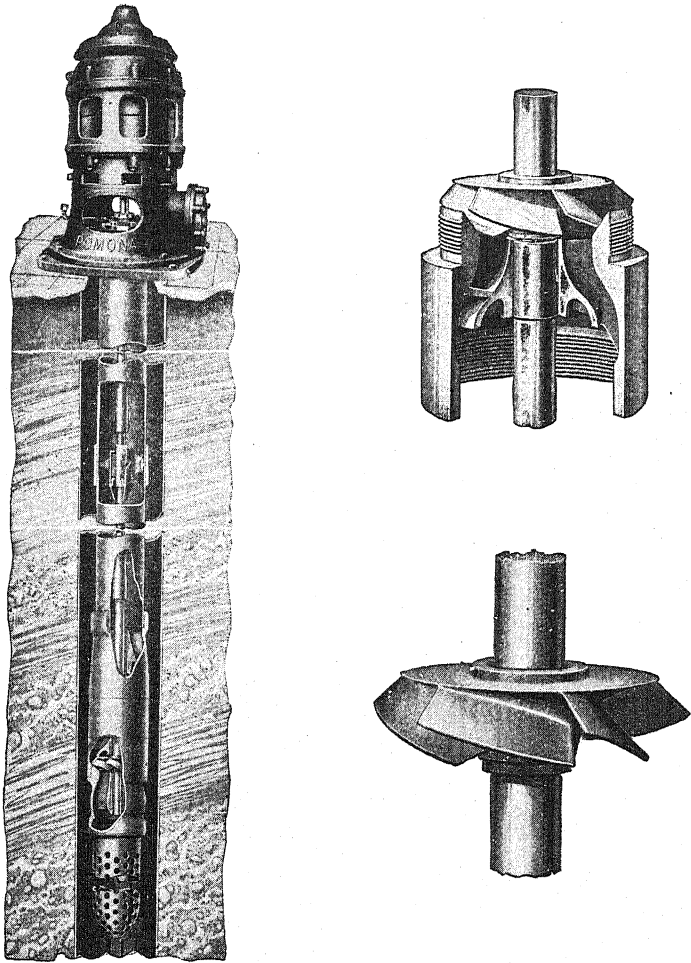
Cutaway section of Pomona Turbine Pump and Motor and details of bowl and impeller keyed to shaft. (Courtesy: Pomona Pump Company.)
